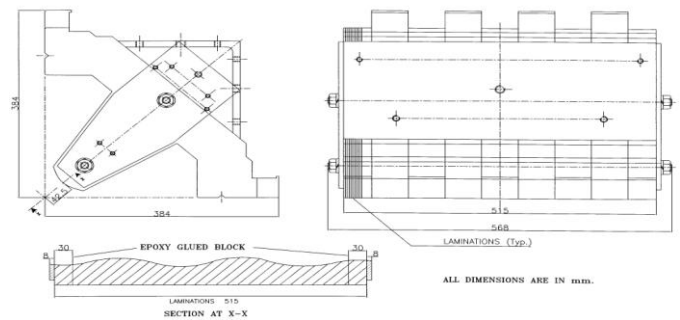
Details of sample welded laminated yoke quadrant.
